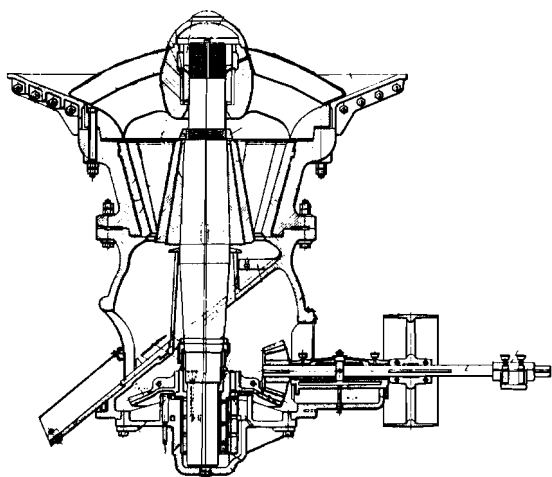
Sectional view of long-shaft suspended gyratory crusher (courtesy of Allis-Chalmers).
